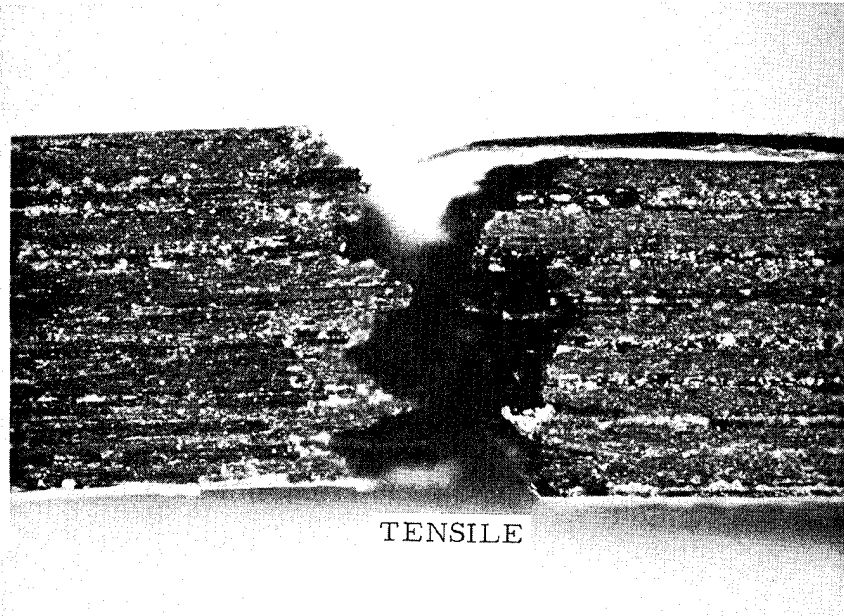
18X EDGE-VIEW OF IMPACT FRACTURE AREA OF PANEL
